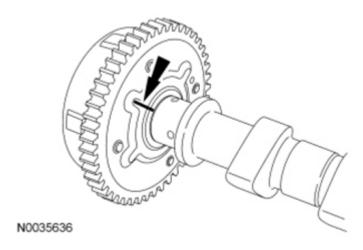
Locating Sprocket And Camshaft Reference Mark Courtesy of FORD MOTOR CO.
